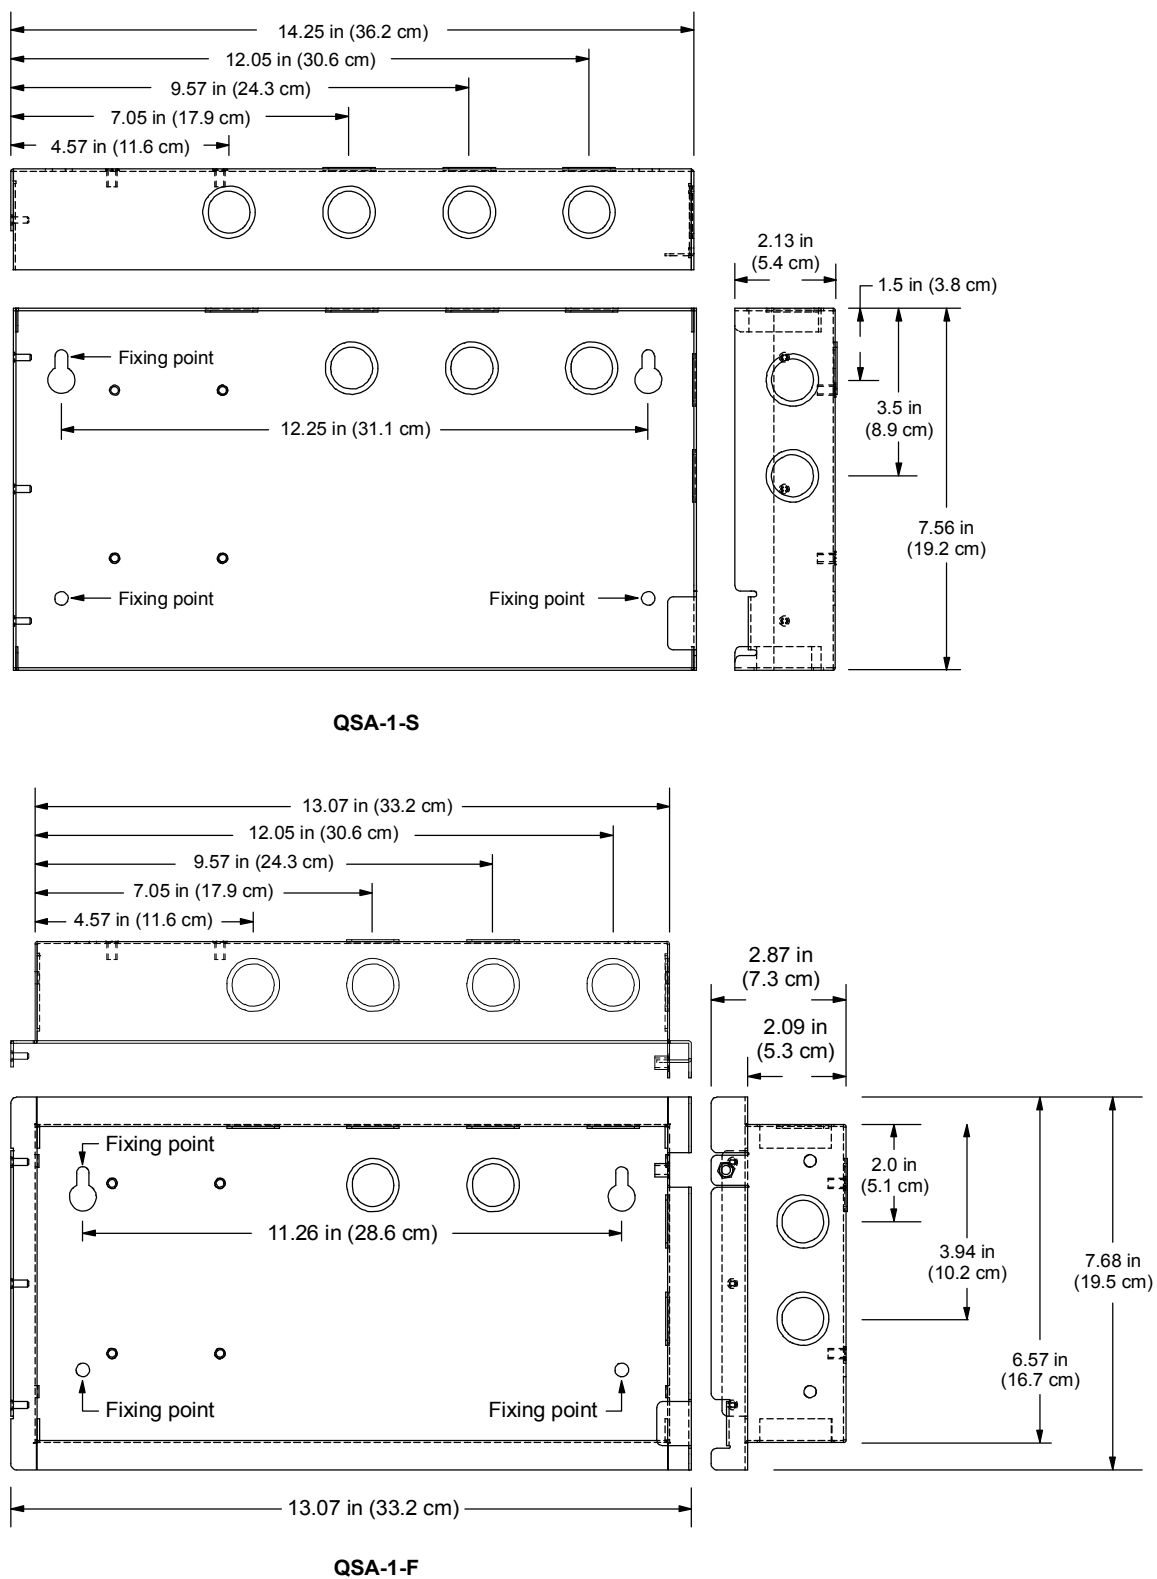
QSA-1-S and QSA-1-F backbox dimensions
